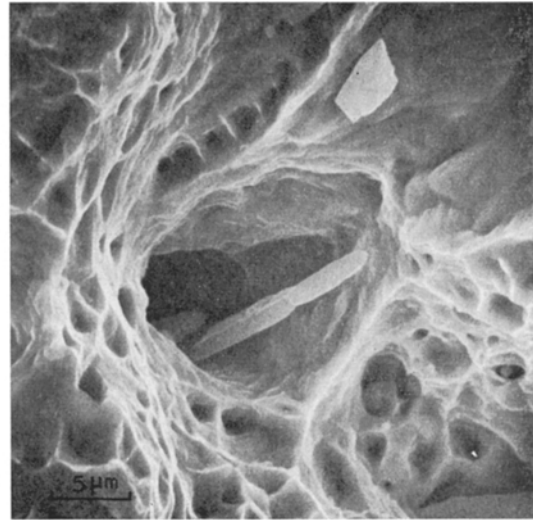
Longitudinal fracture surface showing a fibre structure protruding from a fracture channel.
